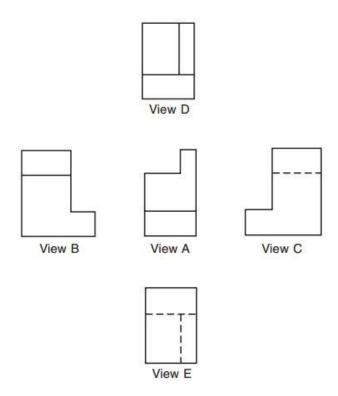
Five views of third angle projection (A sixth View F would depend on the shape of the back/rear view of the object.)
